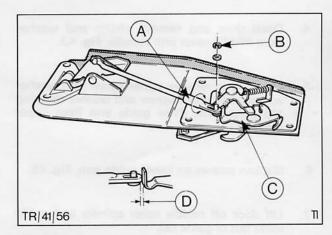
Private lock lever and lock release rod adjustment. Private lock lever in 'locked' position
